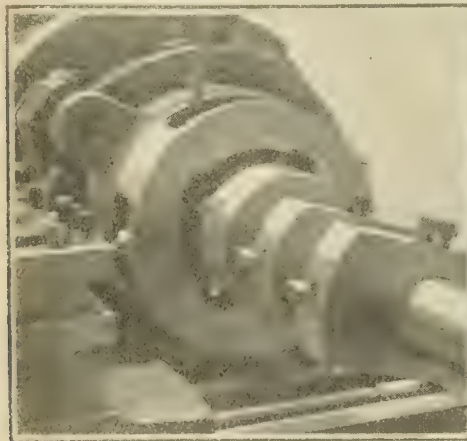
SPECIAL FIXTURE FOR HOLDING THE WORK.
